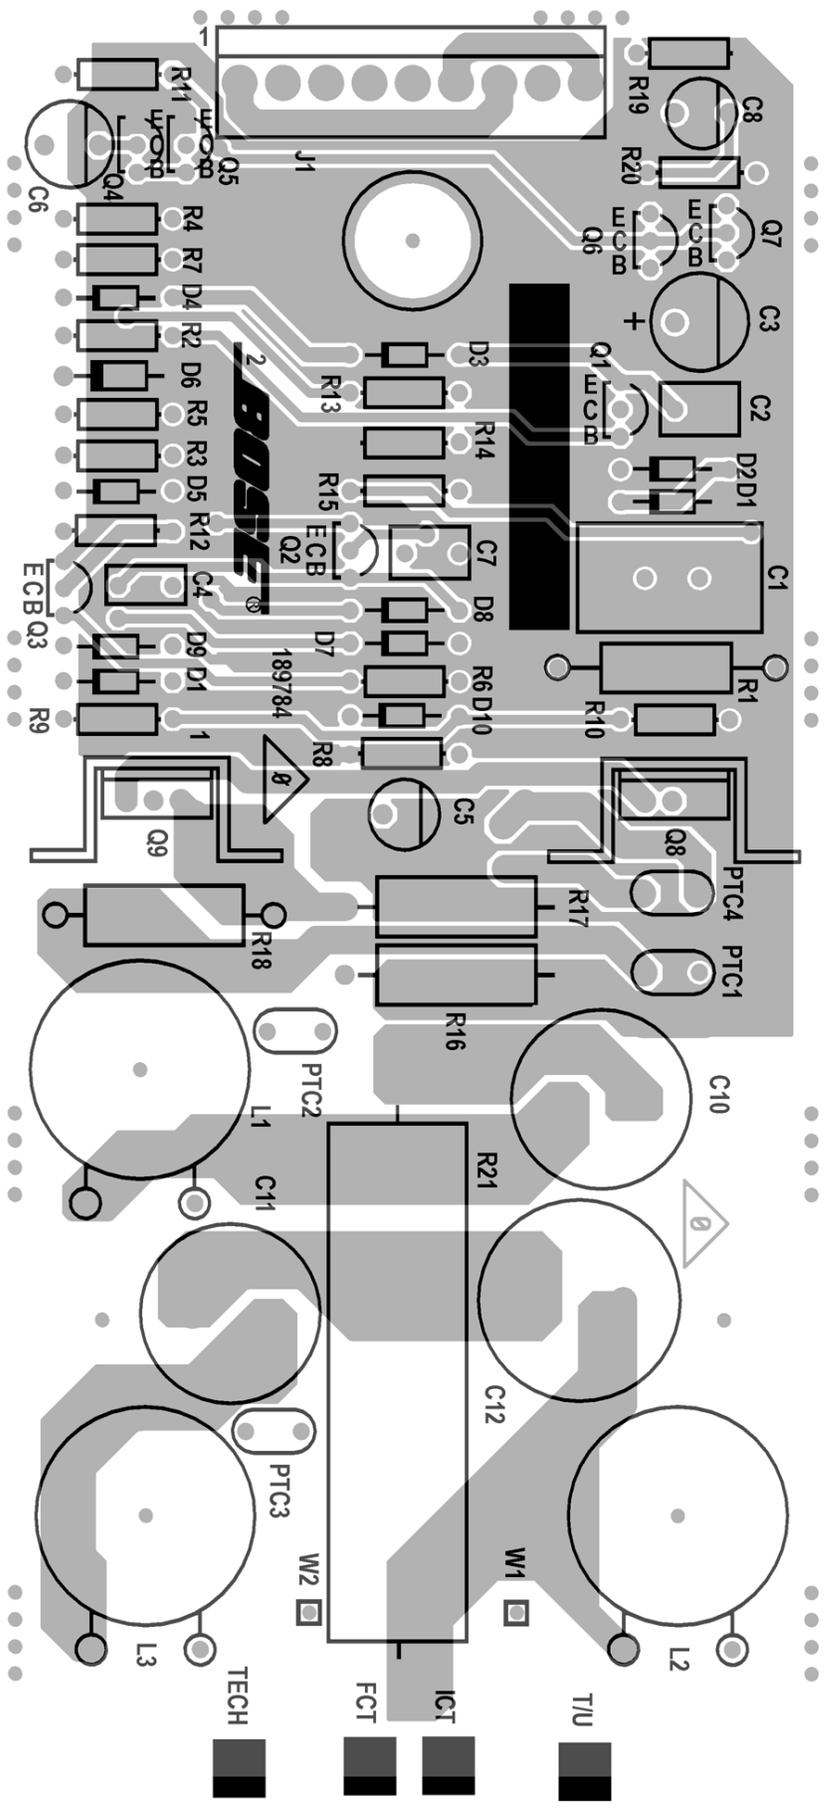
Model 500PM Loudspeaker Crossover PCB Topside Component and Etch Layout Diagram
